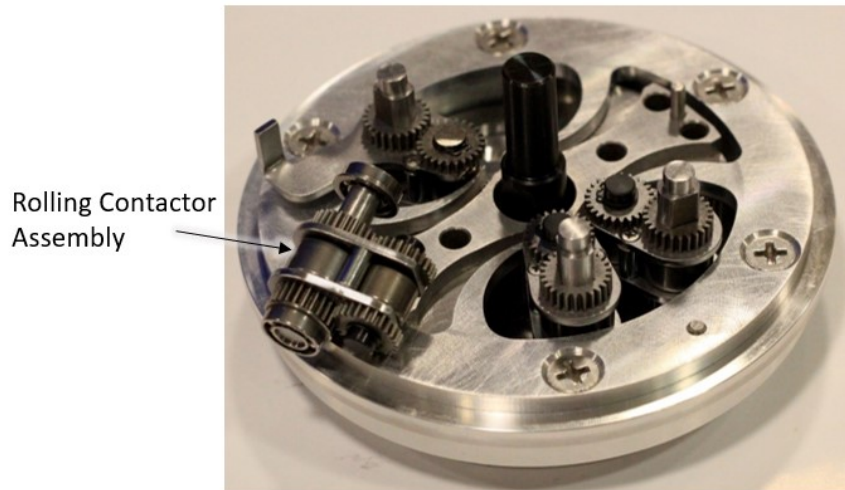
Partially assembled VSA showing rolling contactor subassembly removed from the VSA. Transfer gears linking contactor motions not shown.
